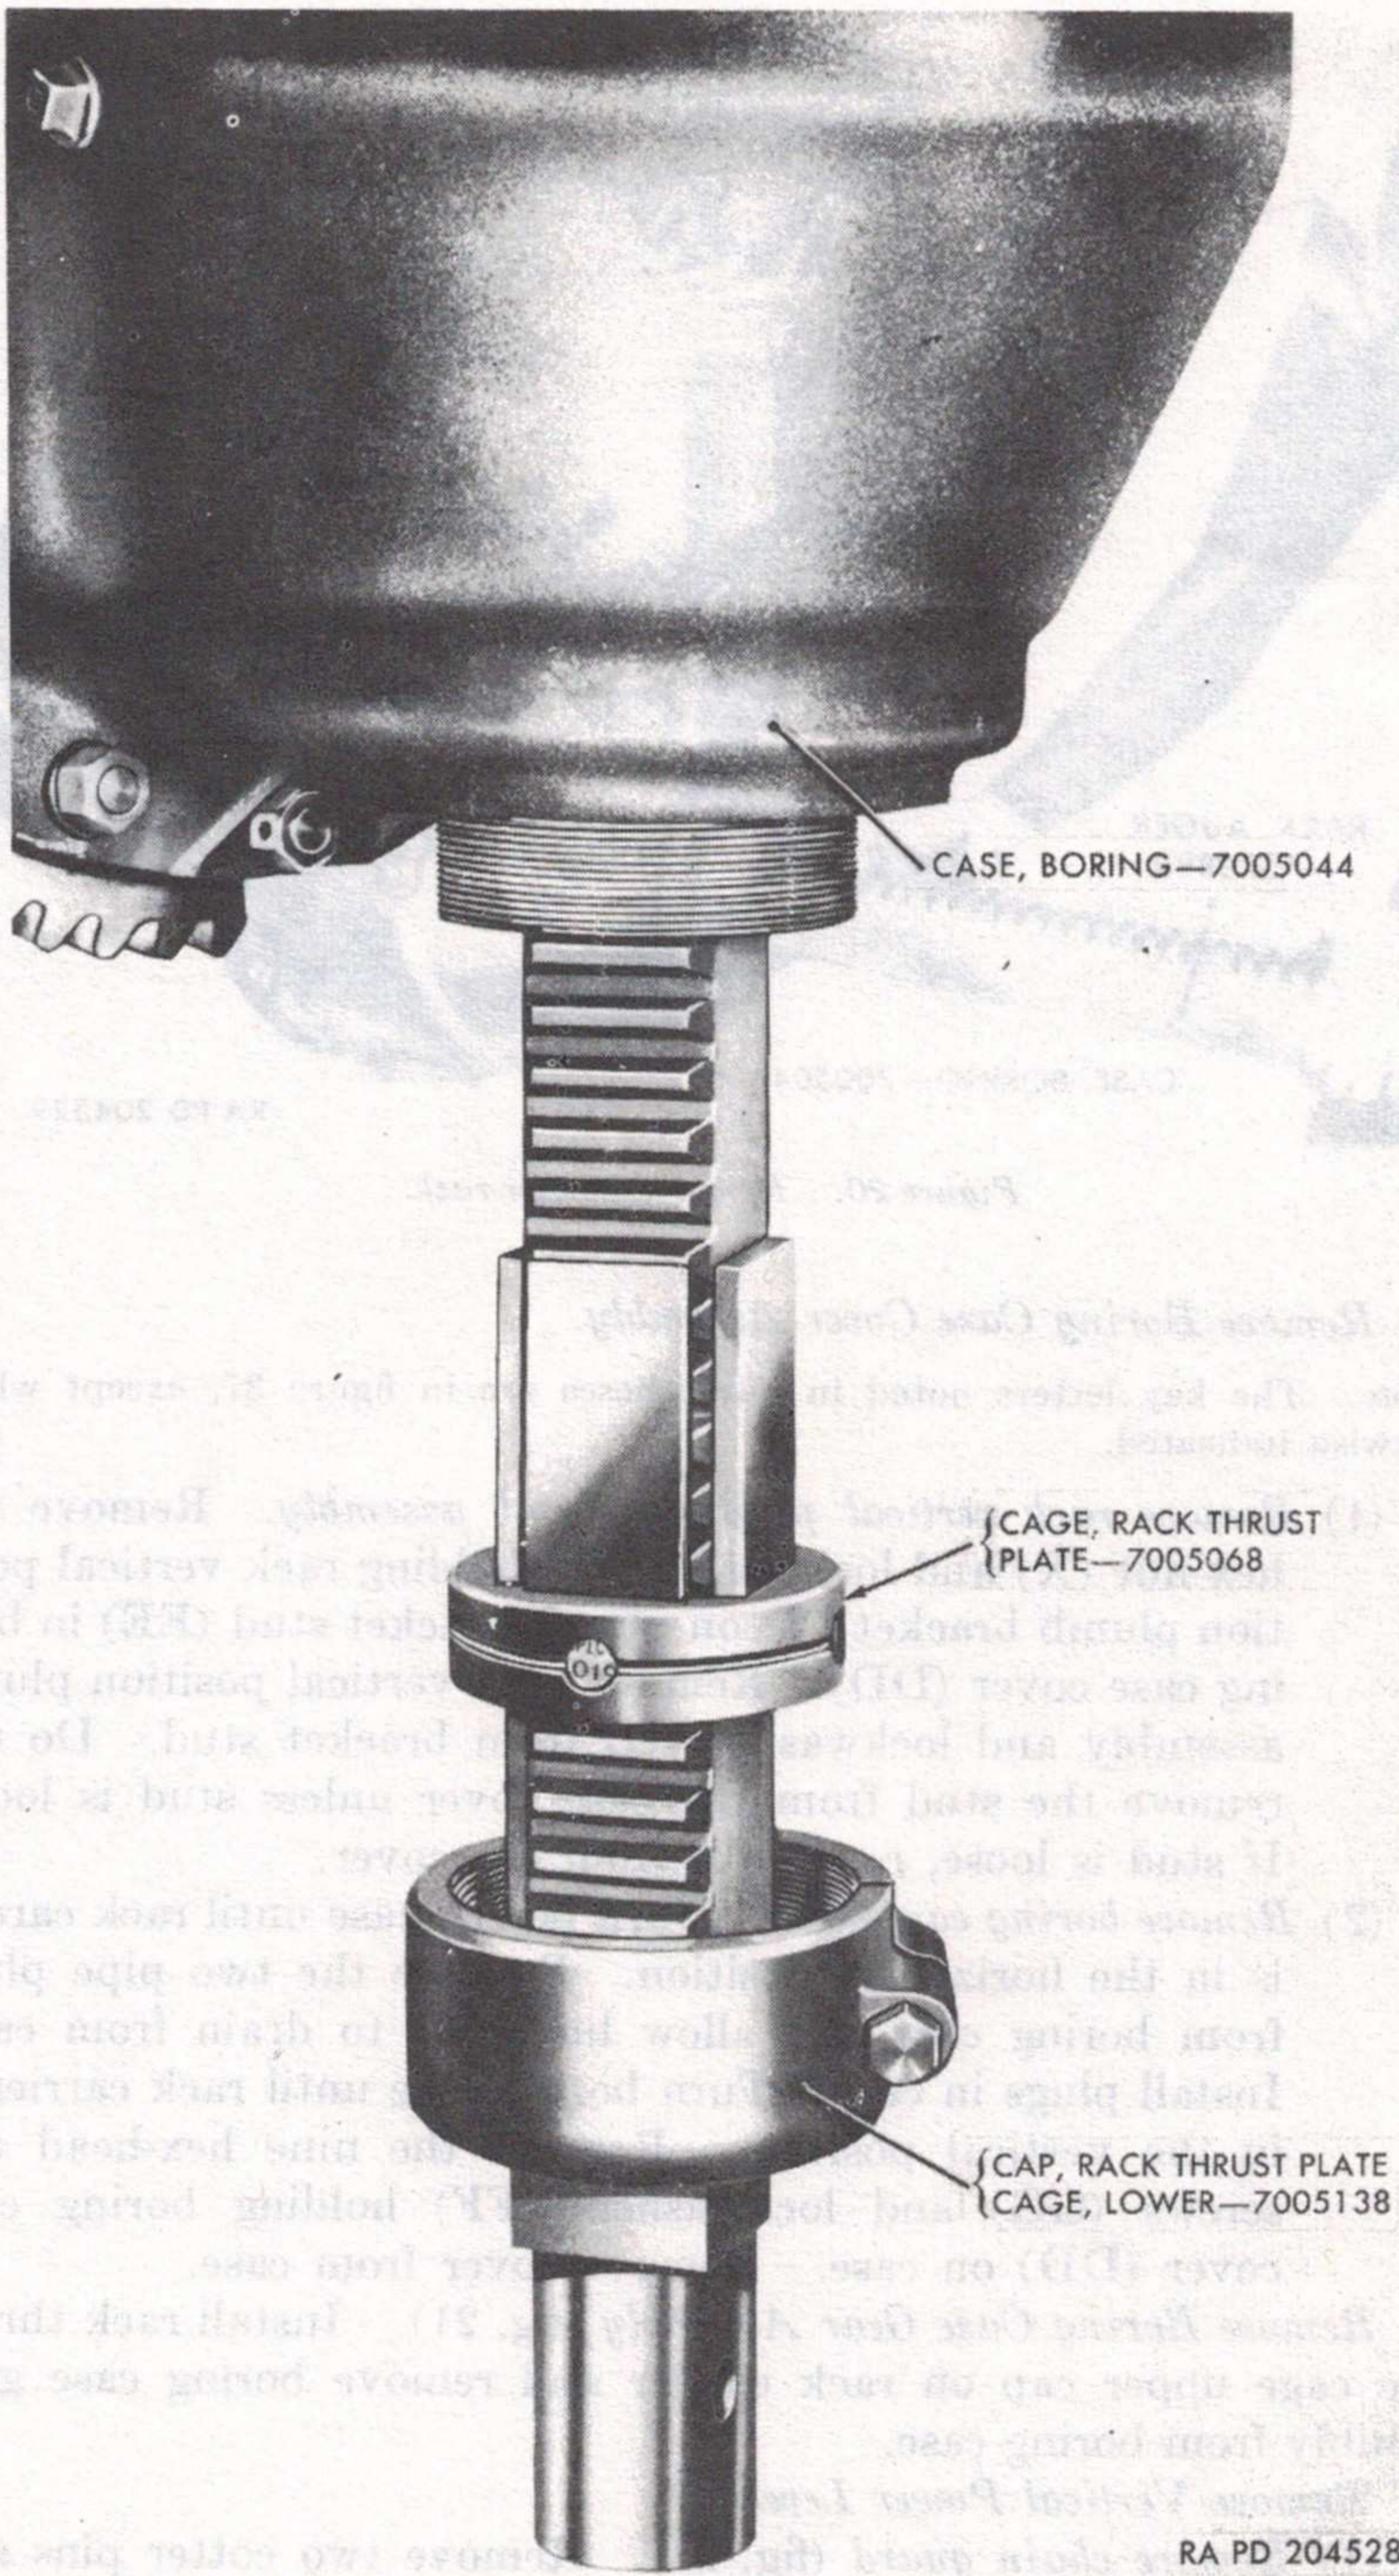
Rack thrust plate cage upper cap assembly—partially removed.
